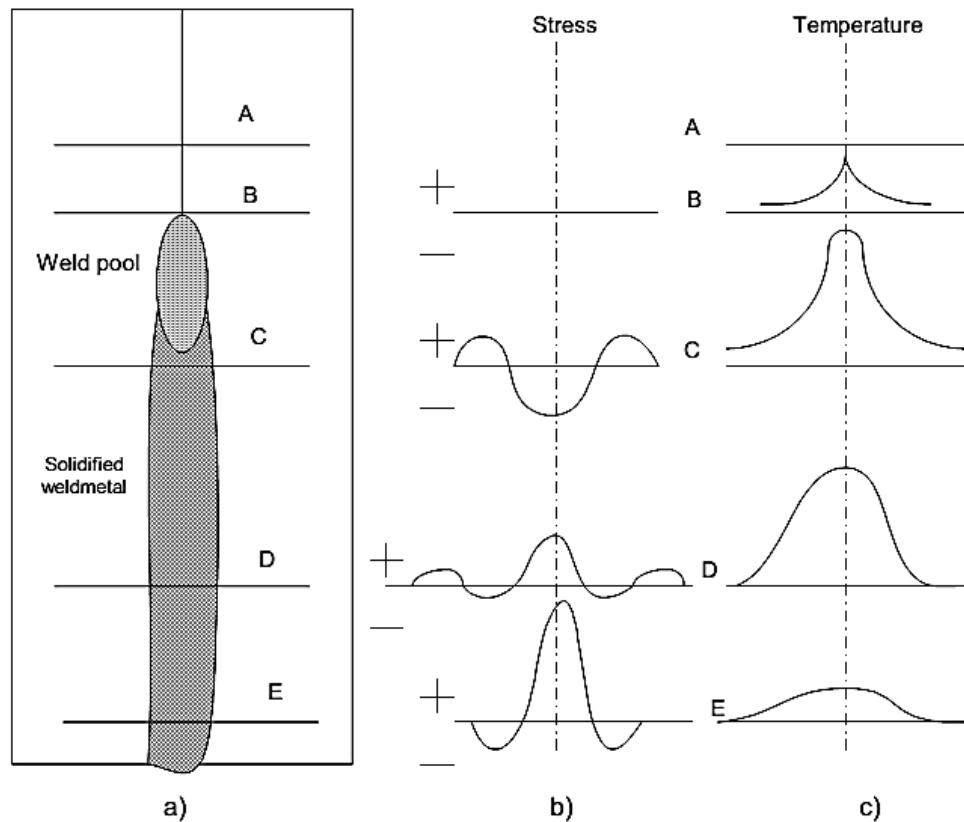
Mechanics of laser transmission welding [Mayboudi *et al.*, 2007].
